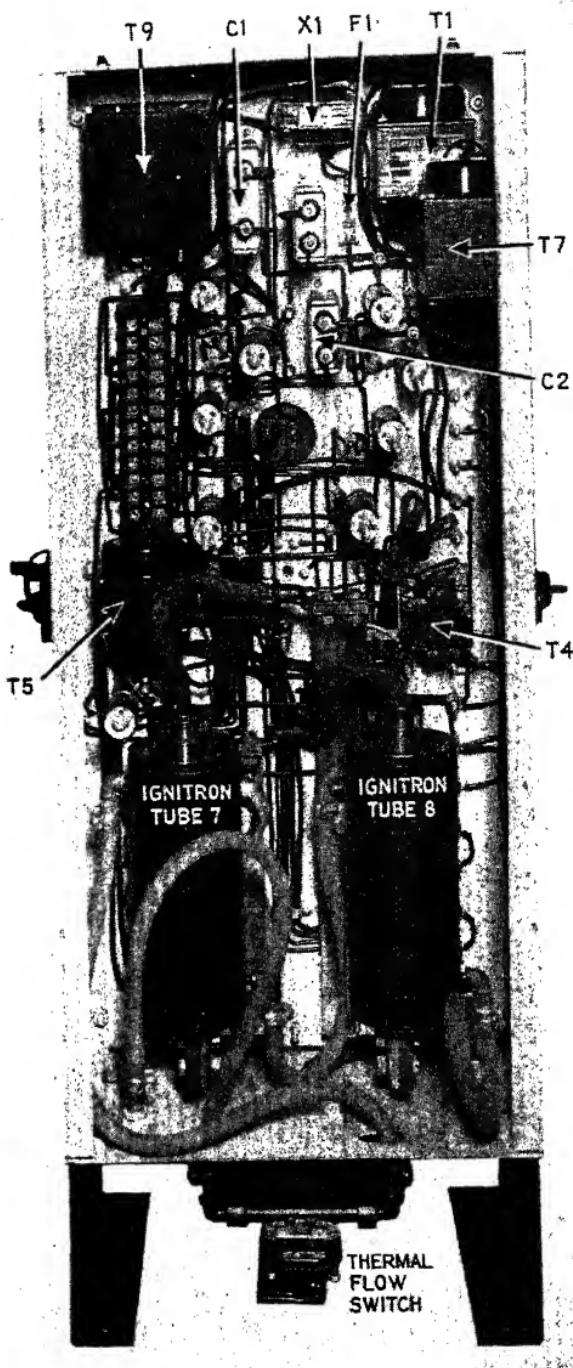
C.—Synchronous spot-welding control (rear view, open).
